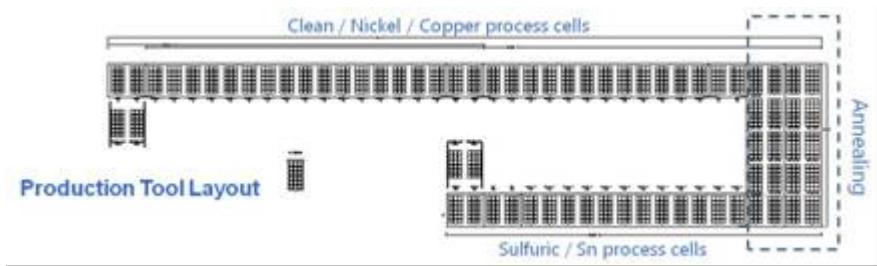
Proposed Tool Layout for Technic's Volume Manufacturing LIP Plating Tool at ~2560 cells/hour.
